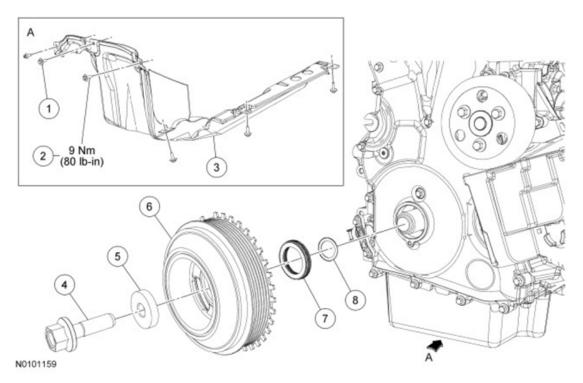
Exploded View Of Crankshaft Pulley And Crankshaft Front Oil Seal Components With Torque Specifications
